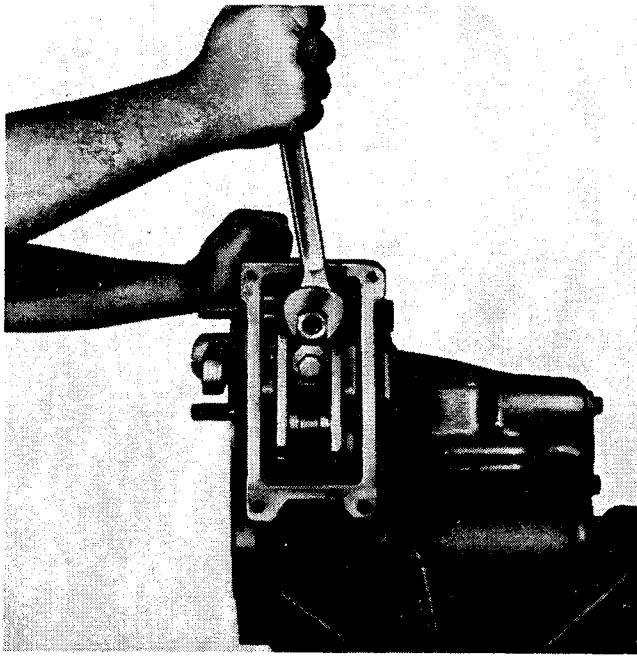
REMOVING BRAKE BAND ADJUSTING NUT
